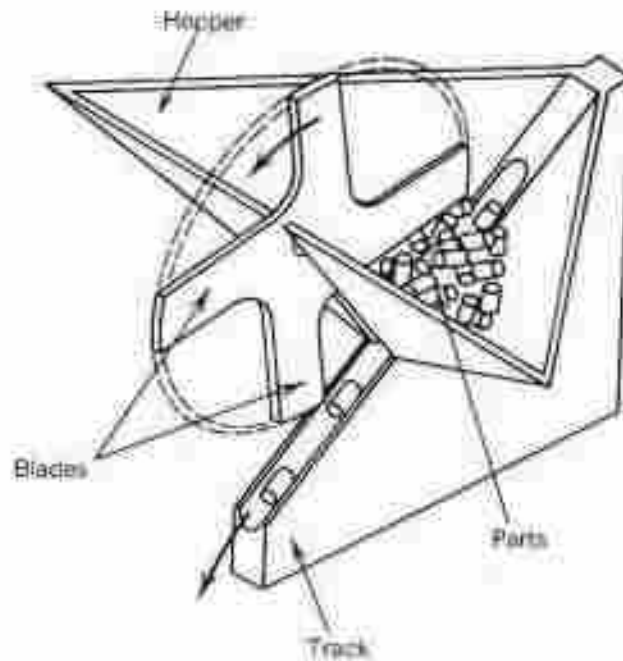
Bladed wheel hopper and tumbling barrel hopper for the feeding of durable cylindrical parts, (a) Bladed wheel hopper
